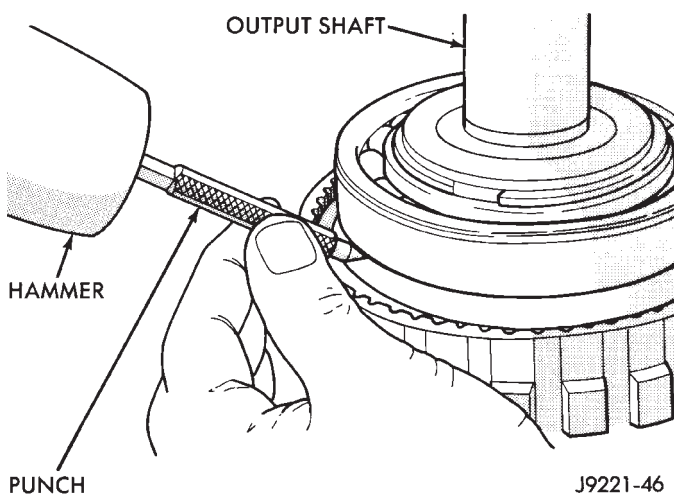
Removing Clutch Drum Inner Retaining Ring
